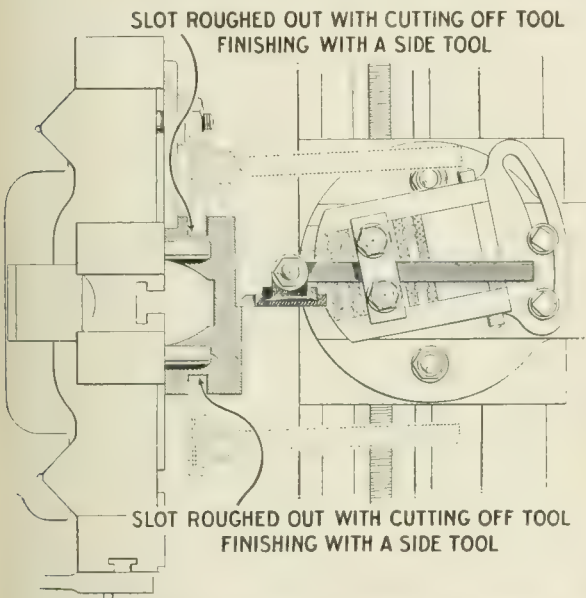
A Planer Job Involving Two Positions and Three Cutters of the Almond Tool Holder.
